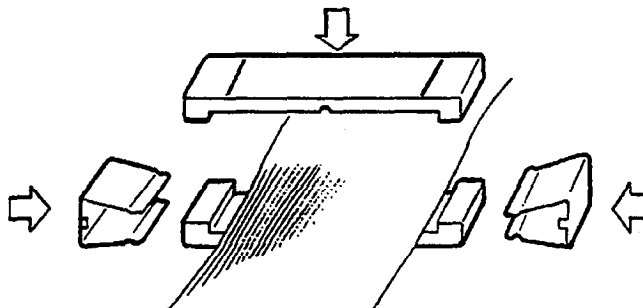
Ferrite Core Installation to MMC-F-11 KTU Ribbon Cable
